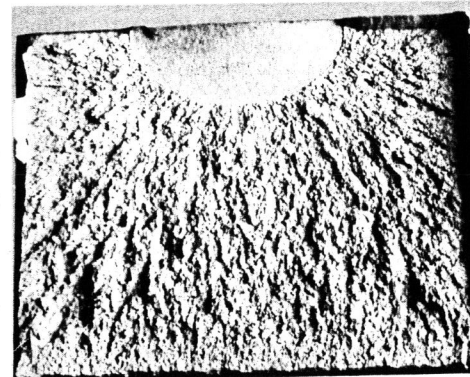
Fracture in "Thumbnail" Crack Specimen. Note shear lip on top surface x 4 (courtesy C.P. You)
